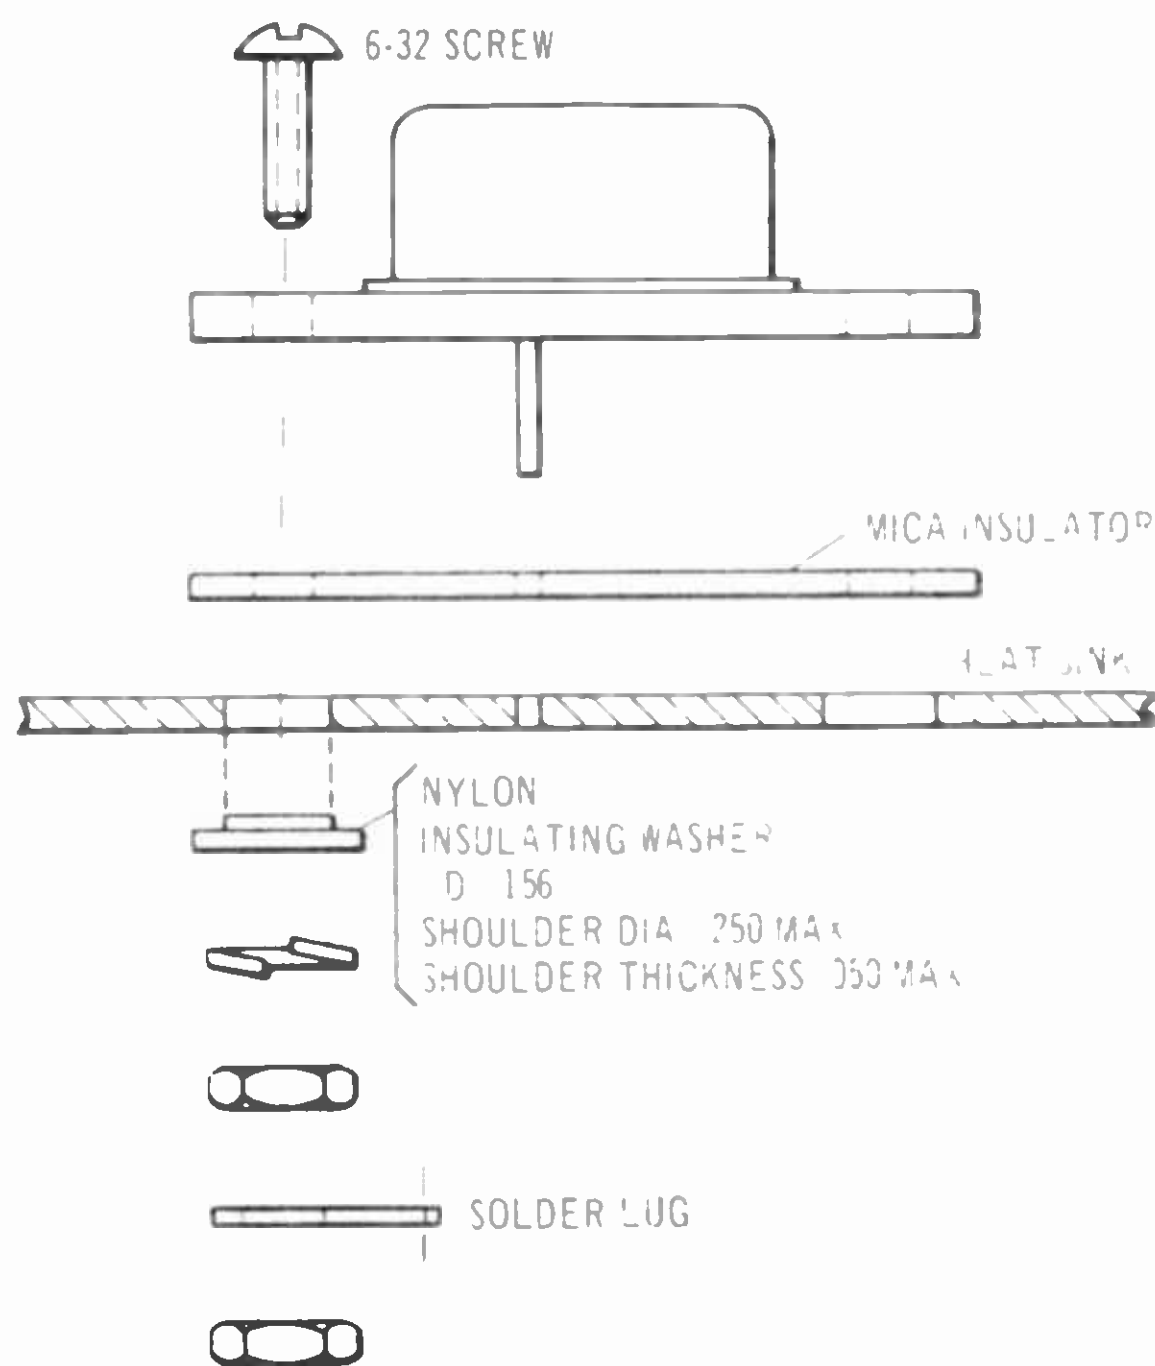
Suggested mounting arrangement for transistors in JEDEC TO-3 package.
